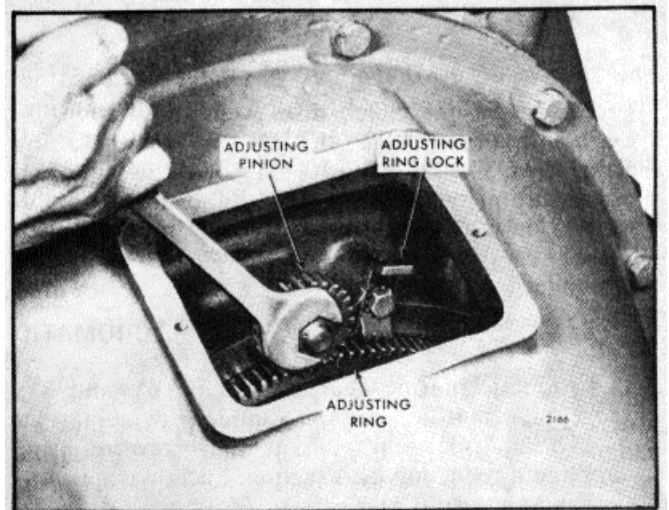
Power Take-Off Assembly Showing Method of Adjusting 18 Inch Diameter Clutch
